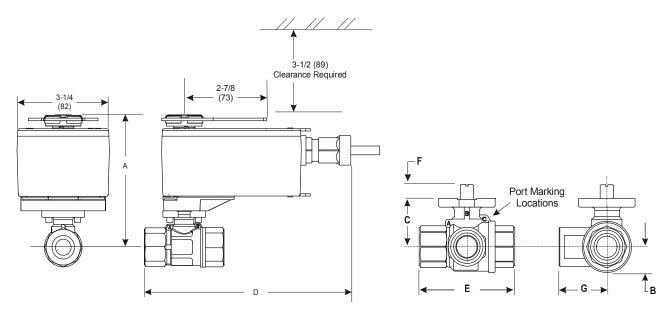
Spring Return VA(M)S24-27-(T)-T Actuated ST2 Series Ball Valve Dimensions, in. (mm)
